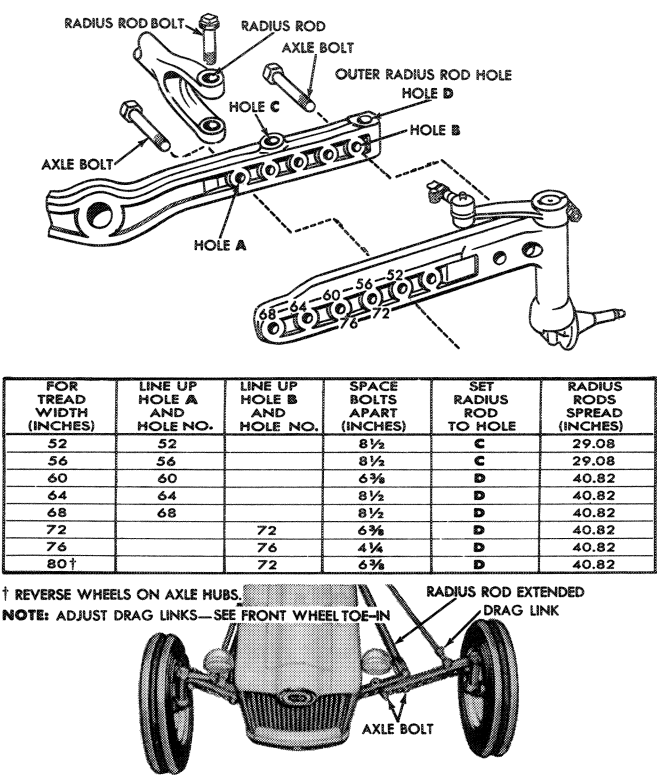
Front Wheel Tread Adjustments—General Purpose Tractors
